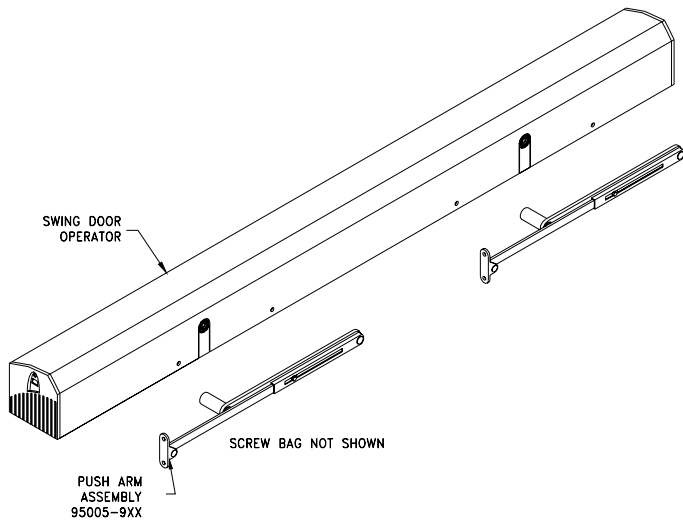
SYSTEM COMPONENTS – DOUBLE PUSH ARM
